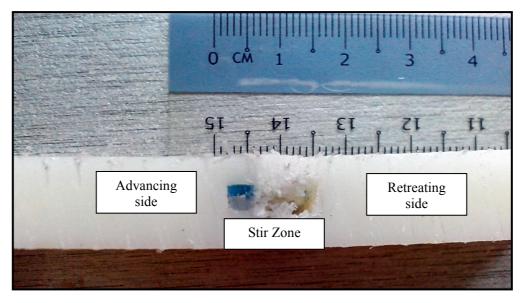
Cross-section of the butt weld joint at 30 mm/min
